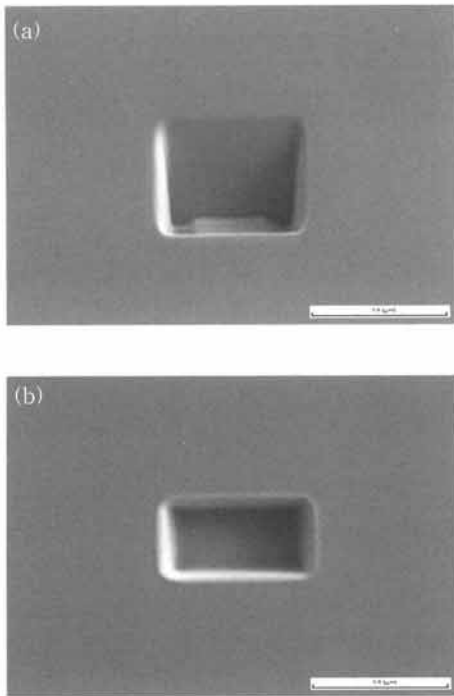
Side (a) and top (b) view of three-dimensional milled image at 0° incident into silicon.
